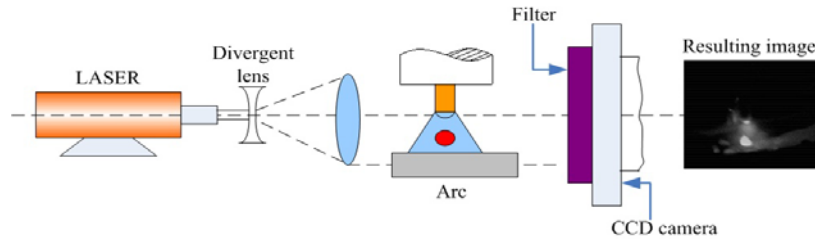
Shadowgraphy principles used in welding [1,2]
